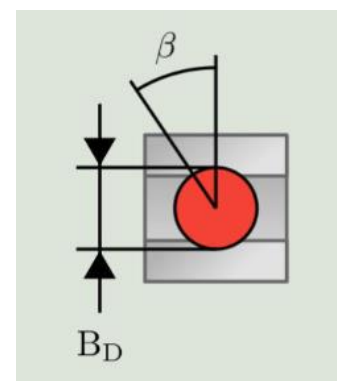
Rolling Element Bearing Geometry & Contact Angle [12]
